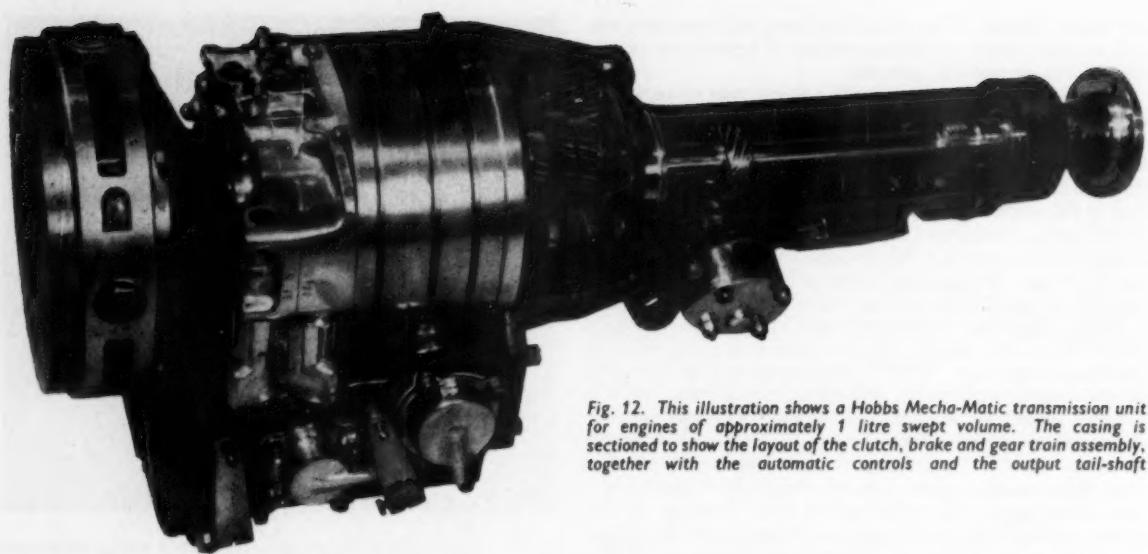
This illustration shows a Hobbs Mecha-Matic transmission unit for engines of approximately 1 litre swept volume. The casing is sectioned to show the layout of the clutch, brake and gear train assembly, together with the automatic controls and the output tail-shaft
